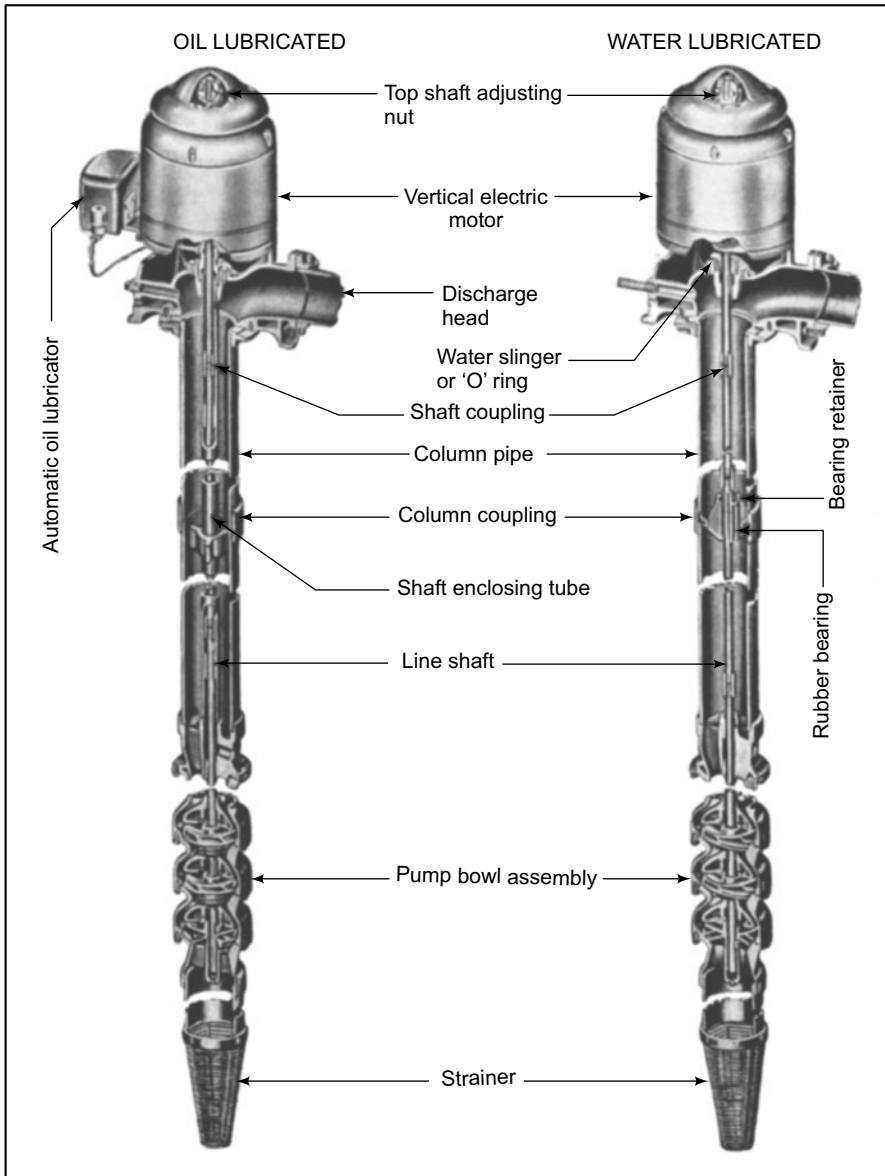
Sectional views of oil-lubricated and water-lubricated vertical turbine pumps showing main parts and their assembly
